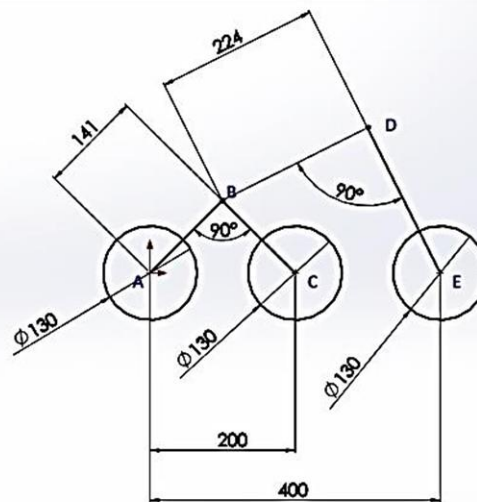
2D Drawing of Rocker Bogie Mechanism
